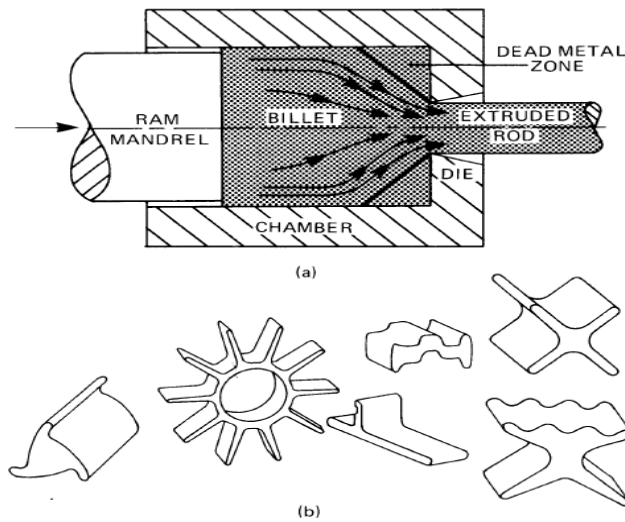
a) Extrusion Process, b) Some parts manufactured by extrusion process
